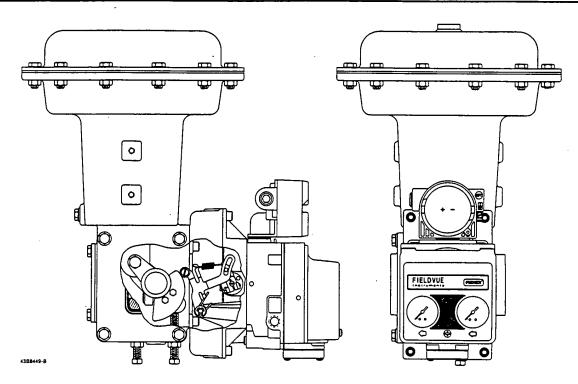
Type DVC5020 Mounted on Type 1052 Size 33 Actuator
